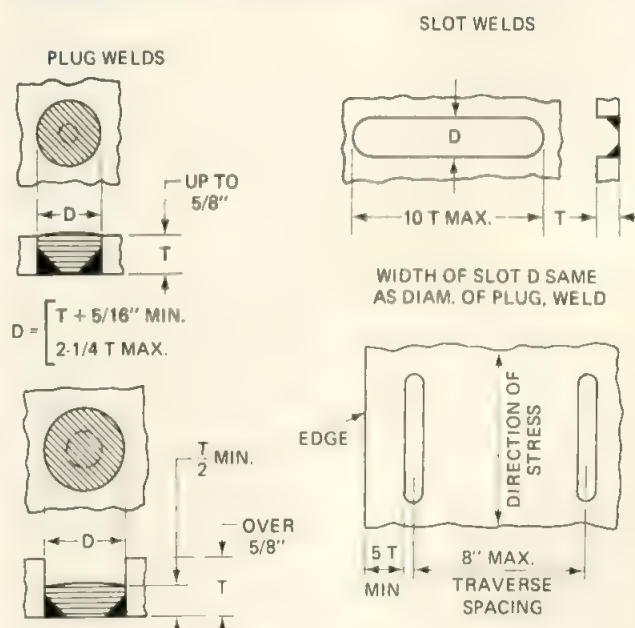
Other types of welds related to the five basic joints.
